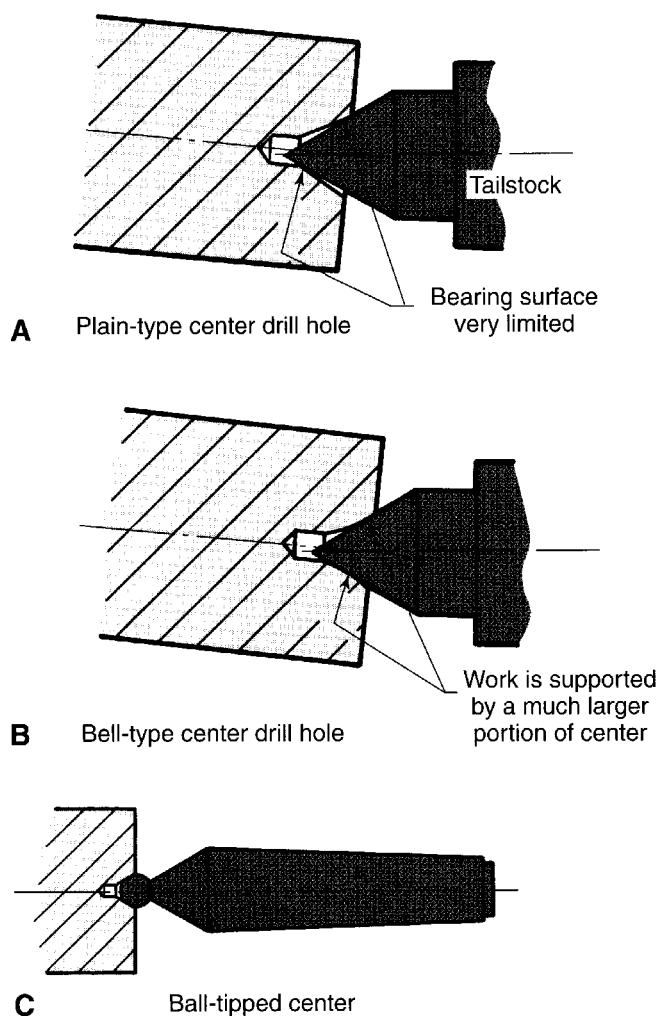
Taper turning done by the offset tailstock method is hard on the tailstock center. A—Center point does not bear evenly in conventional center hole. B—A center hole drilled with a bell-type center drill reduces the problem by providing more bearing surface. C—A ball-tipped center lessens pressure on tail center when turning tapers.
